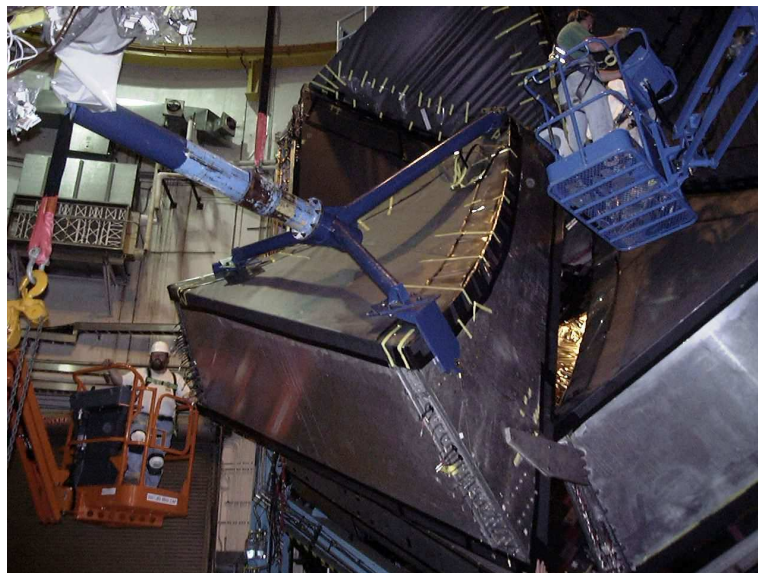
Photograph of the LTCC lifting fixture as attached to an existing LTCC sector in CLAS.
